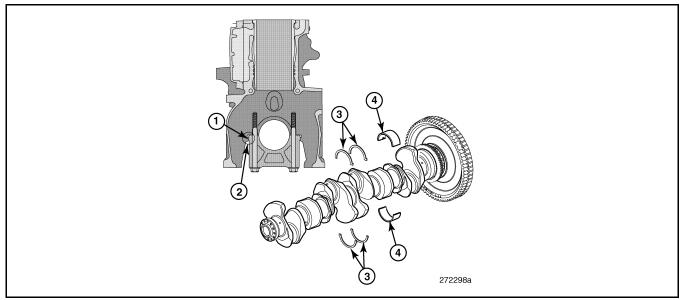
Crankshaft, Bearings, Thrust Washers and Cap Alignment Tabs
